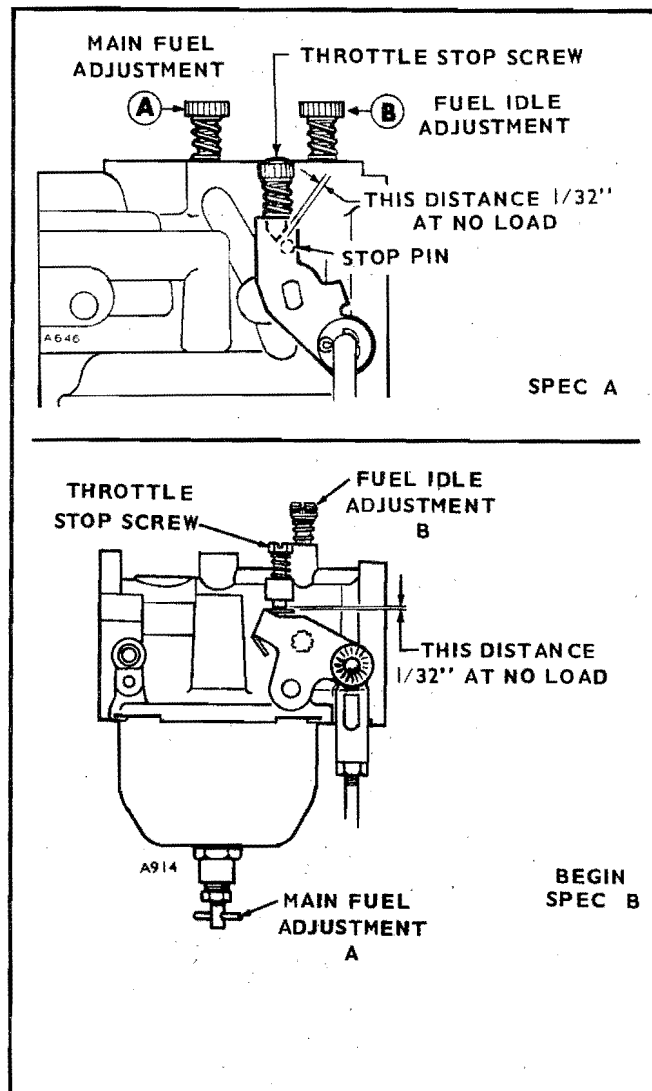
ADJUSTING GASOLINE CARBURETOR
